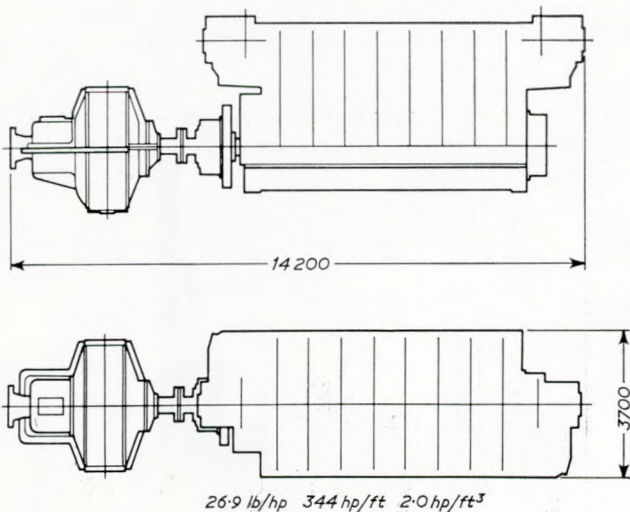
16 000 bhp V8V52/55 engine with epicyclic gear
